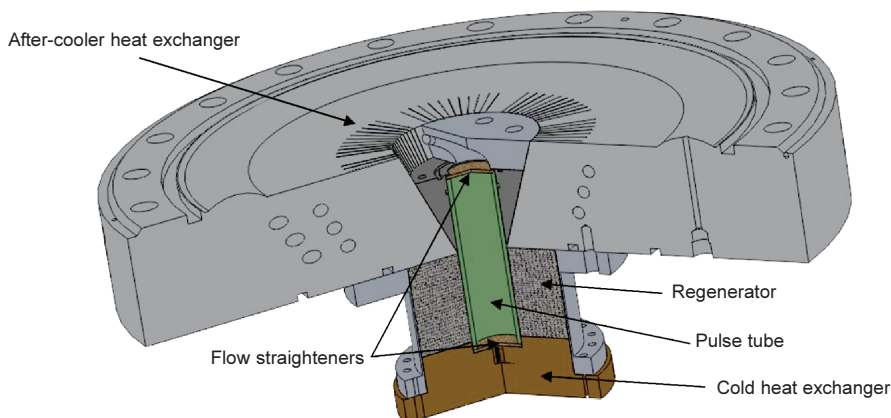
CAD model cut view of the PT250 co-axial pulse tube
